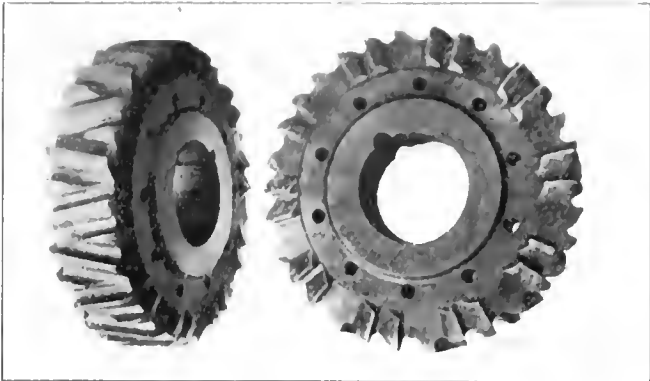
General Appearance of Hellgren's New Type of Milling Cutter.
